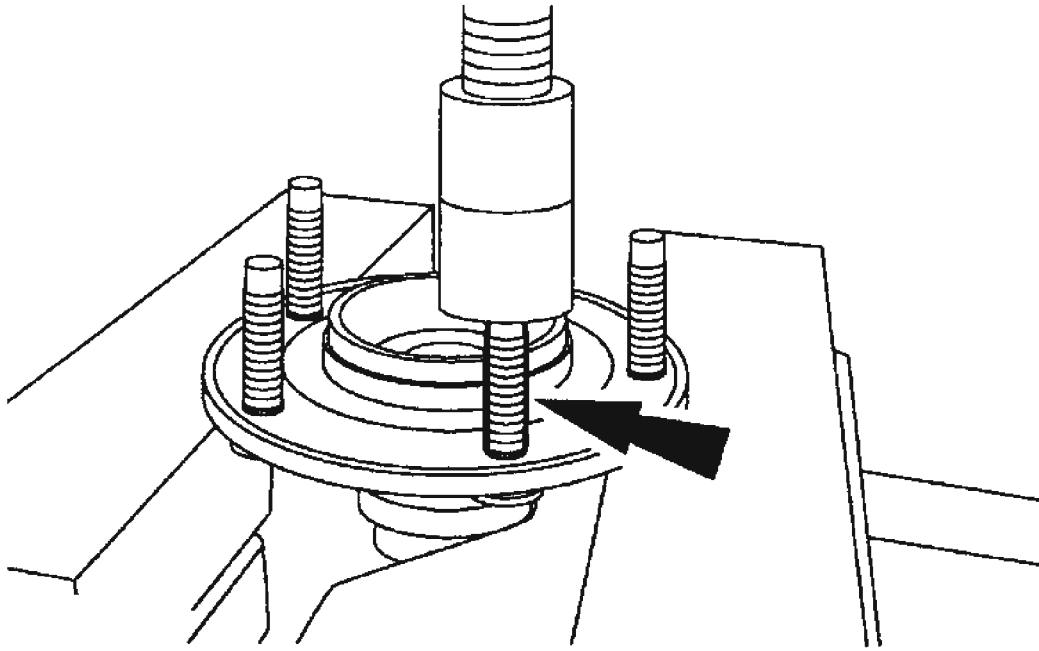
Installing Halfshaft End Into Hub Assembly
